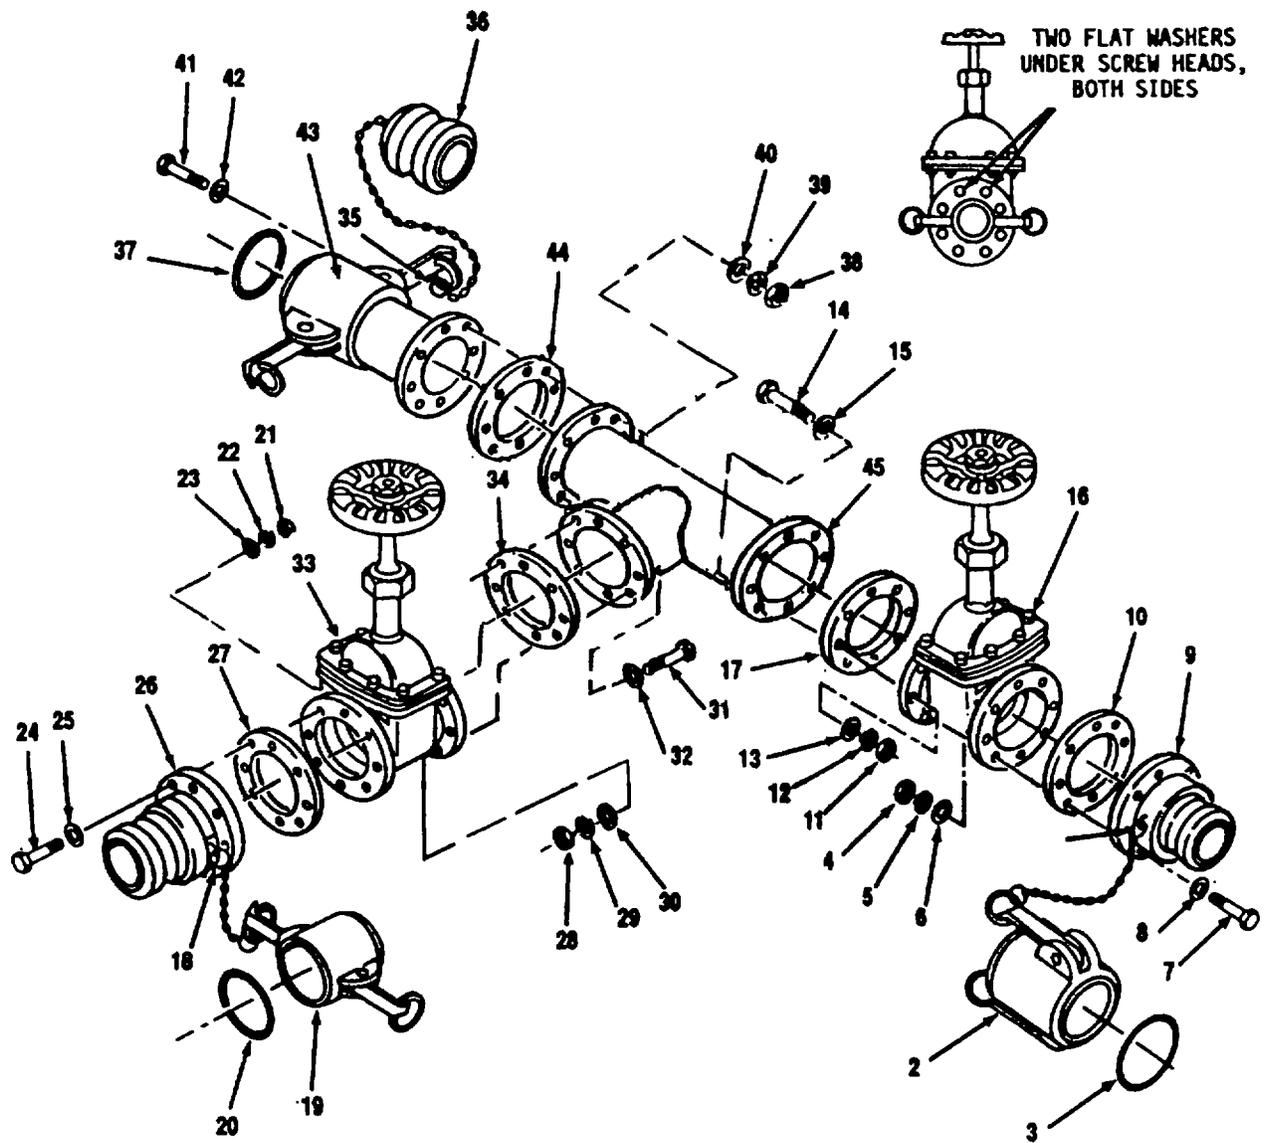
Tee and Dual Gate Valve Assembly (9148-Y2) Assembly
